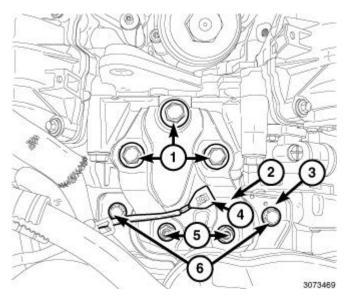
Fuel Injection Pump Courtesy of CHRYSLER GROUP, LLC
